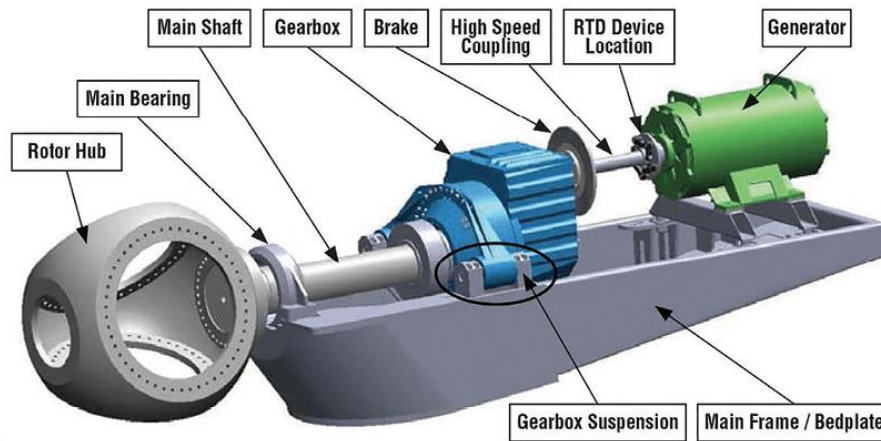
Drivetrain with one main bearing (source: NREL<sup>47</sup>)
